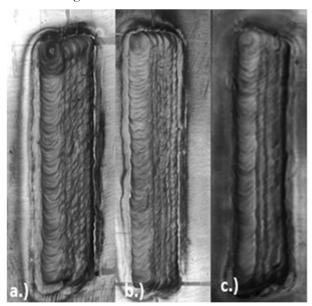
Hard-facing made with TIG technology: a.) one-layer b.) two-layer c.) three-layer
